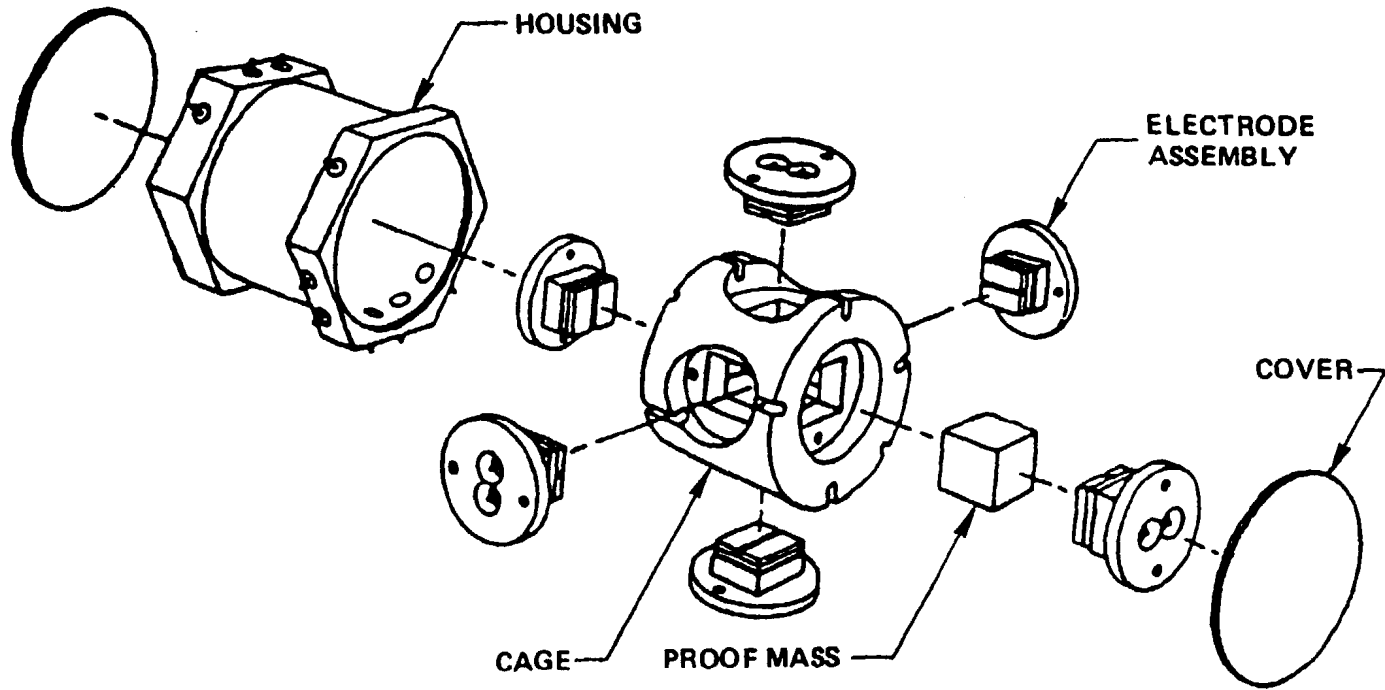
MESA CUBE PROOF MASS MECHANICAL ASSEMBLY
